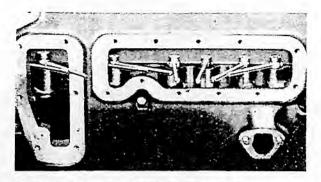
RETAINING TAPPETS BY CLIPS MF140 WHILE CAMSHAFT IS REMOVED
